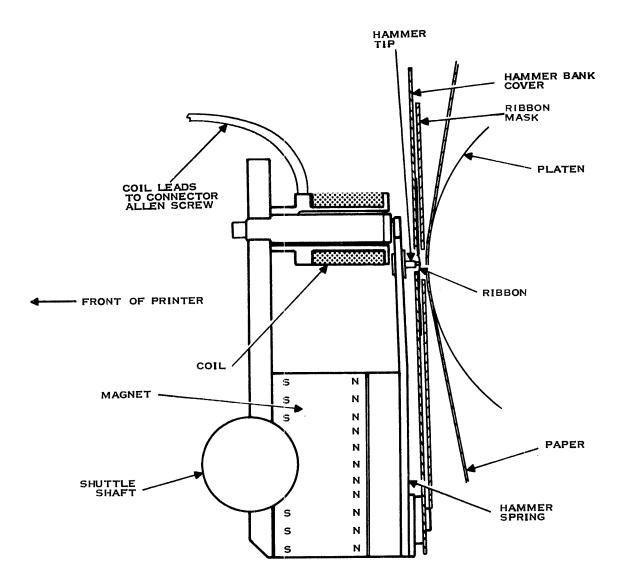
LP600 Printer Hammer and Shuttle Arrangement, Cross Section
